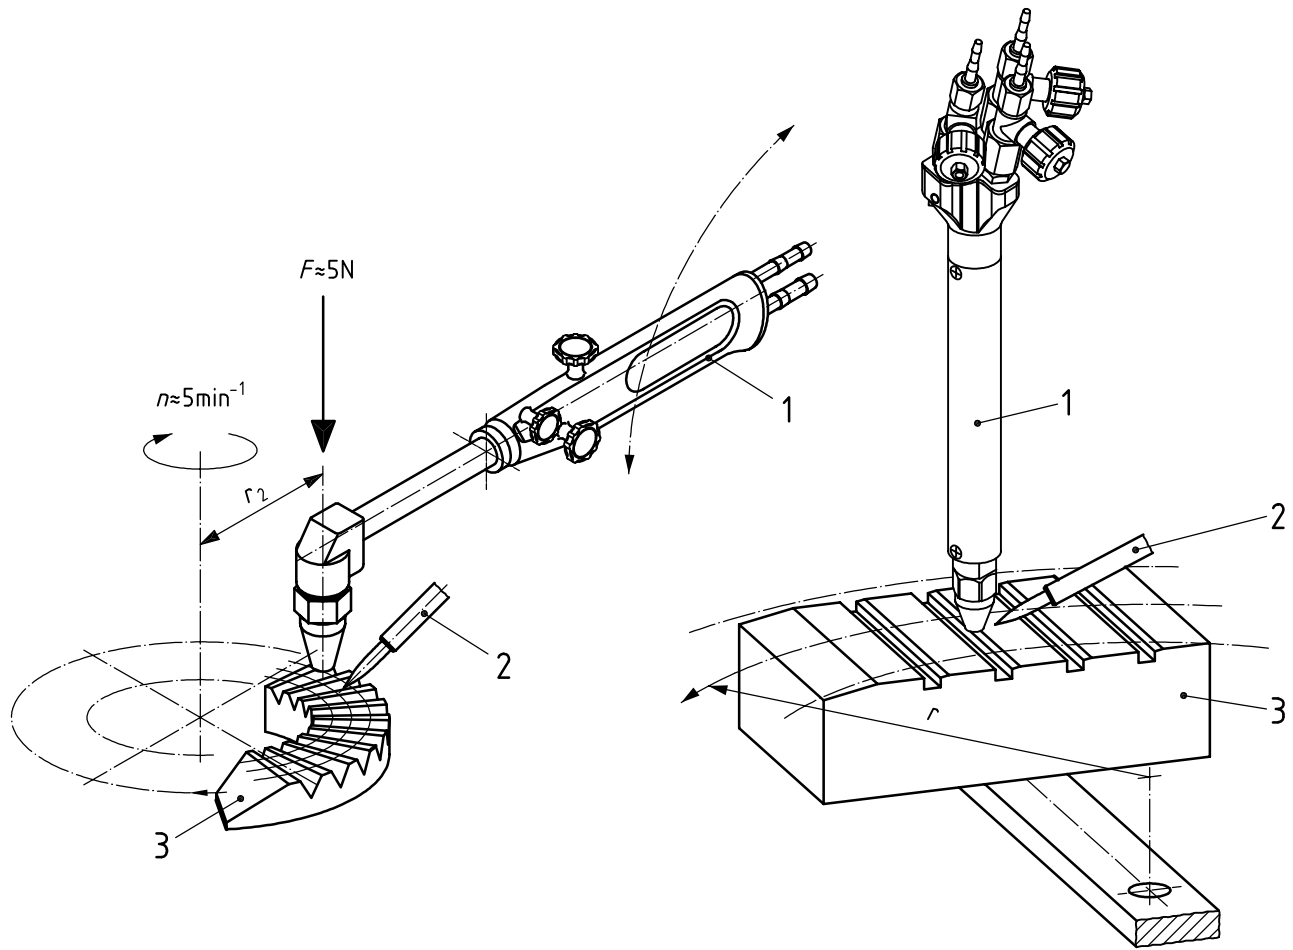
Copper circular test segment for testing, cutting and heating blowpipes
